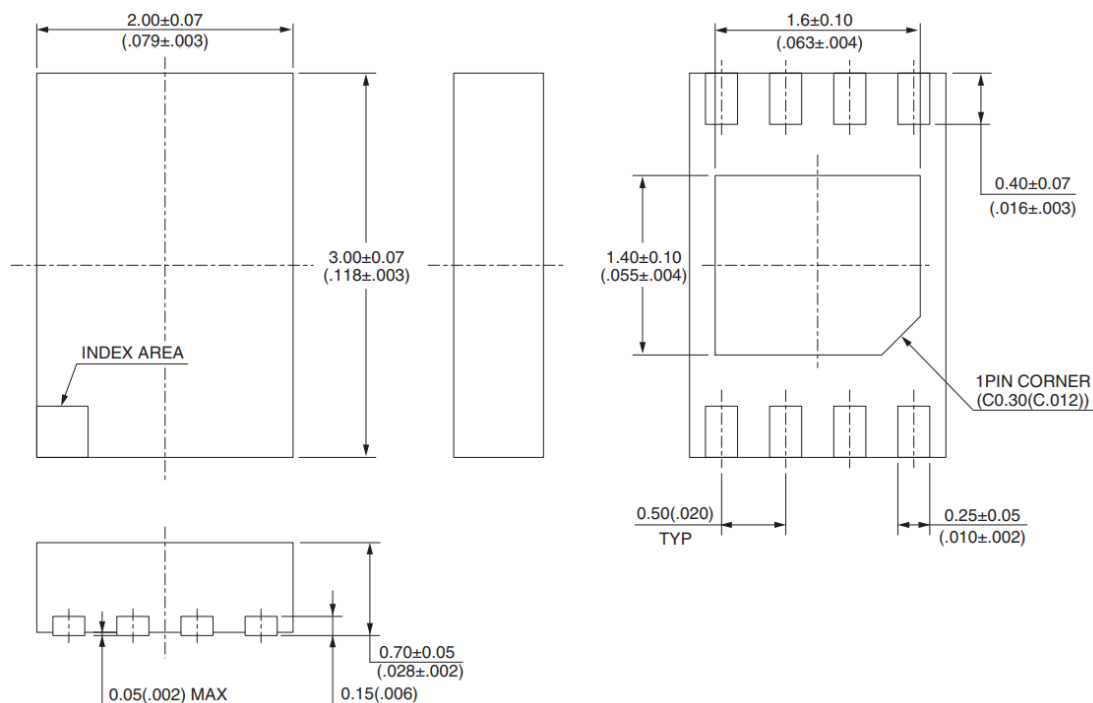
Package dimensions of the MB85RS64TU. Dimensions in mm (inches).
